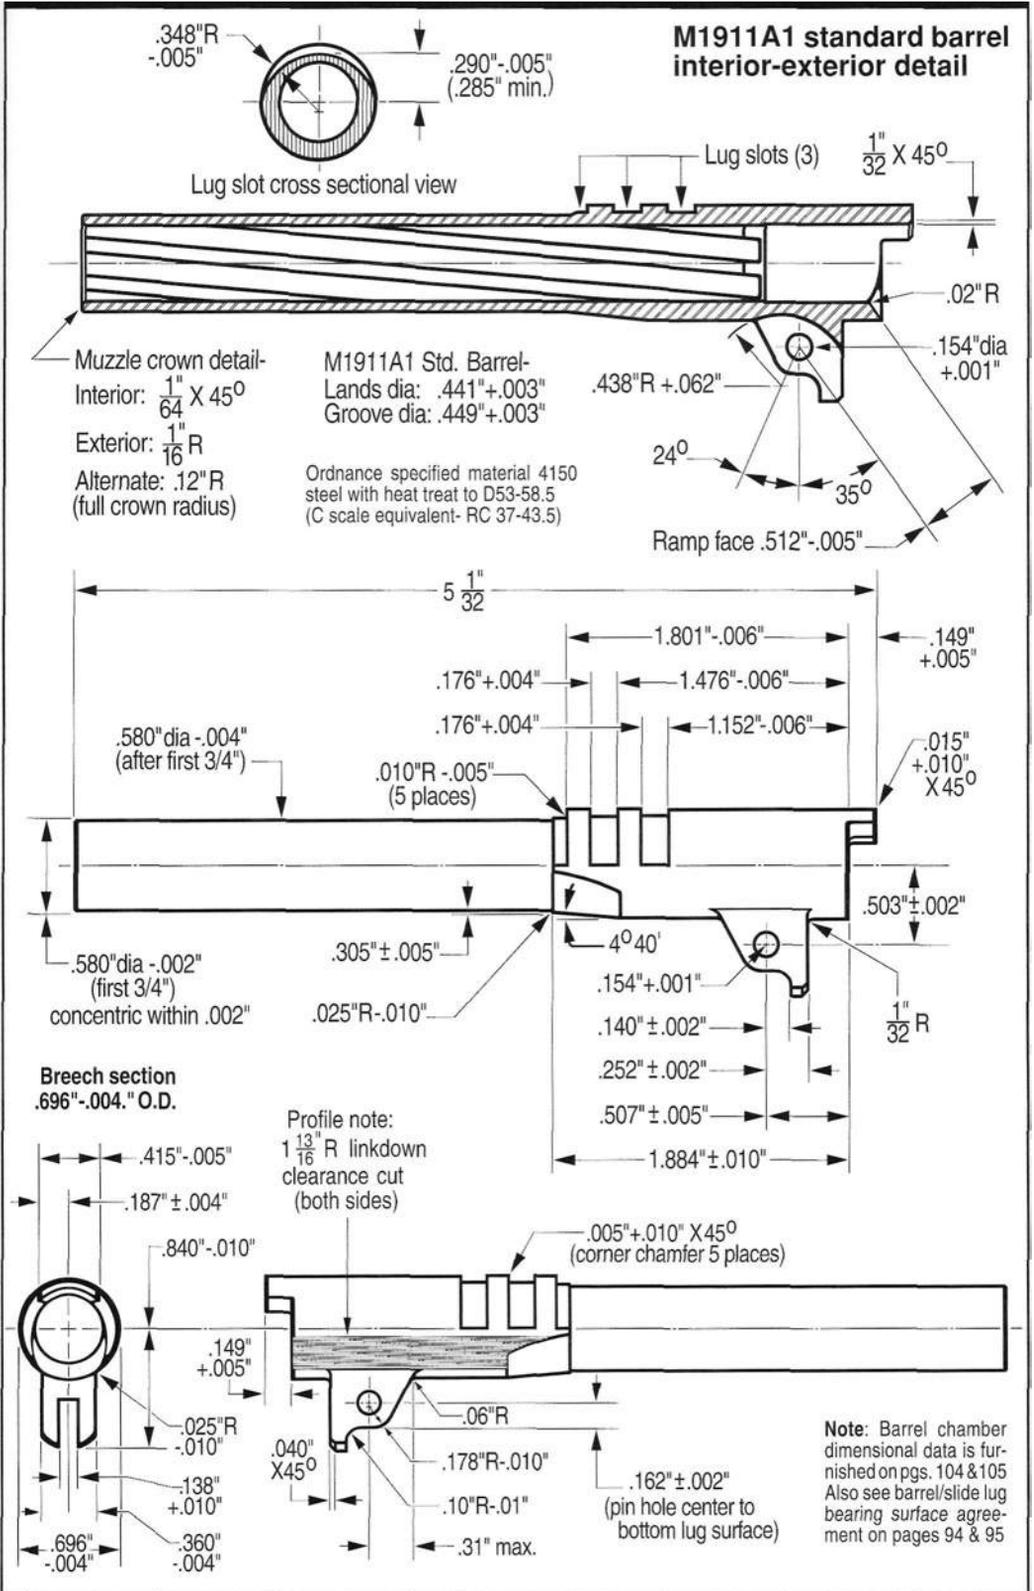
Ordnance style sectional and exterior view detail drawings by Heritage -VSP staff artist show M1911/M1911A1 barrel critical operating surface locations and dimensional inspection data.
